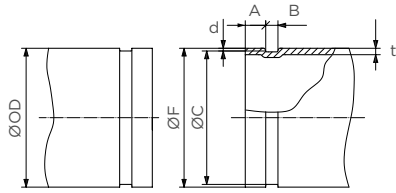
Roll grooved-end dimensional reference points for Table 1
